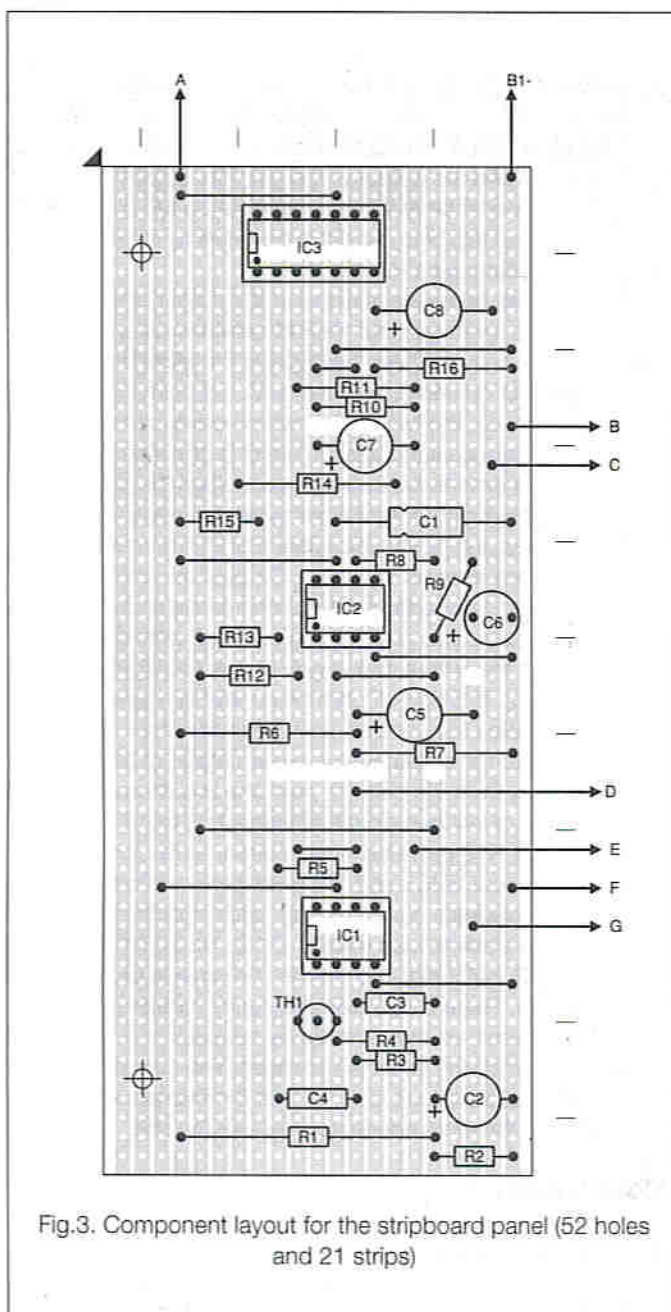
Component layout for the stripboard panel (52 holes and 21 strips)
